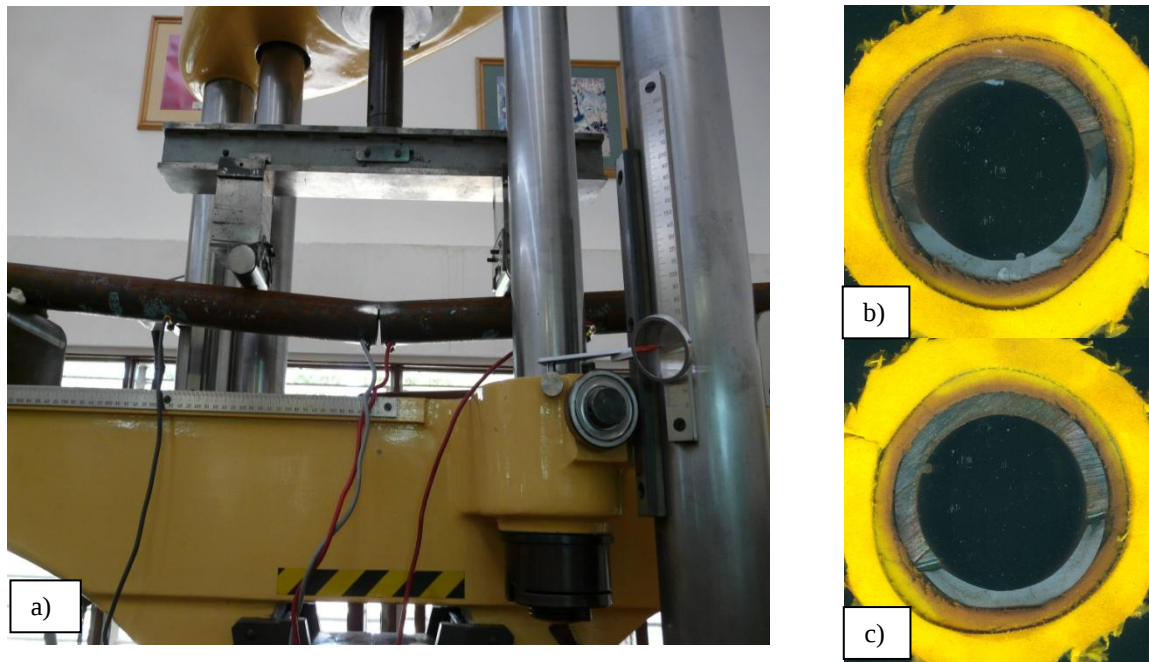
a) Precracked coiled tubing fracture test. b) Precracked Coiled tubing fracture surface. c) Blunt notched coiled tubing fracture surface
